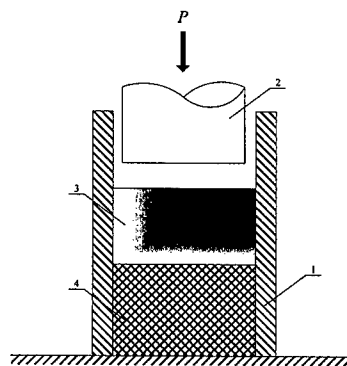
Diagram of squeeze casting : (1) mould; (2) plunger; (3) melt; (4) preform of aluminum borate whisker
